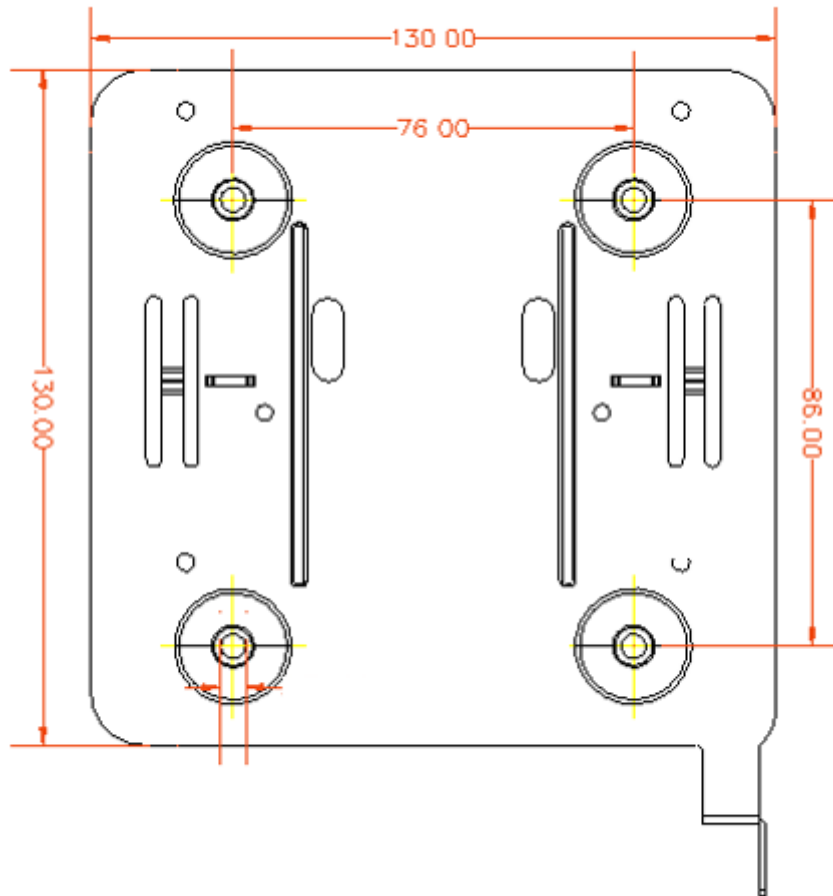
Dimension (in mm) View of AP-MountKit-T1 Bracket
